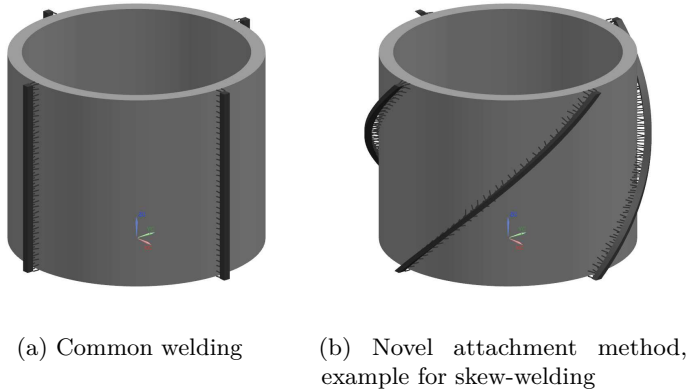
Illustration of the novel lamination attachment method for welding with four weld lines
